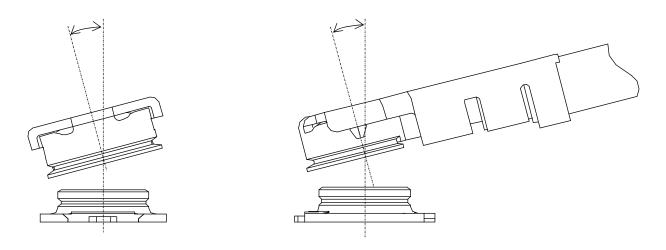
Limit angle of engagement (Engagement only) 嵌合限界角度(開始時のみ)
